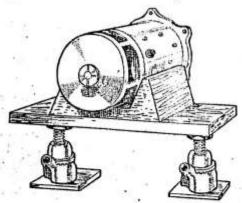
CRADLE RIG FOR DISMOUNTING AND REFITTING DYNAMOTOR
